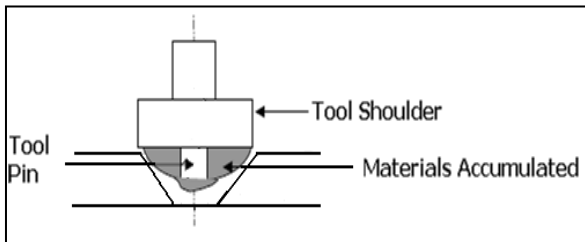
Weld metal accumulated between tool pin and shoulder.
